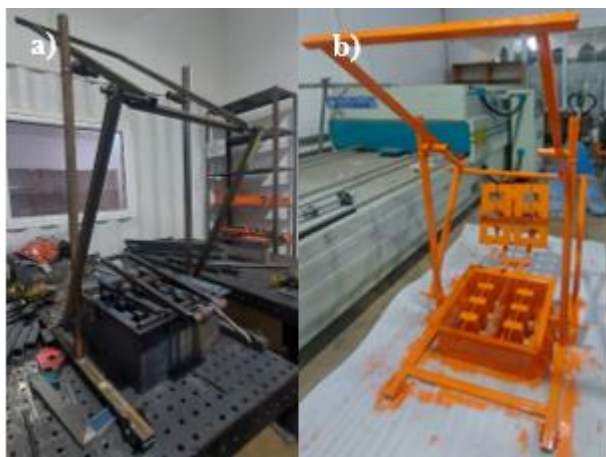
Manufactured prototype of the device for producing construction blocks (a) before painting, (b) after painting).
